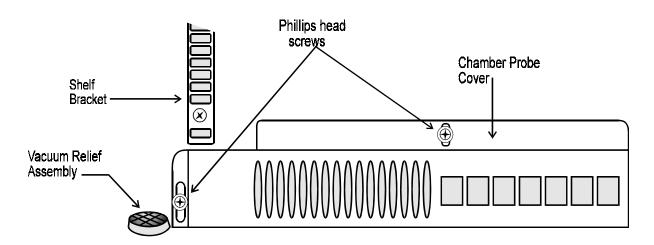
Vacuum Relief And Probe Cover Assemblies
